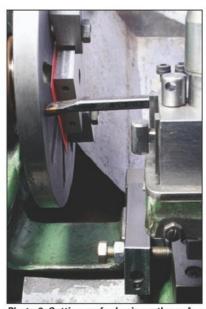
Setting up for boring a through hole in a workpiece mounted on to the faceplate. Note the piece of card between workpiece and the faceplate to allow the tool to just pass completely through.
